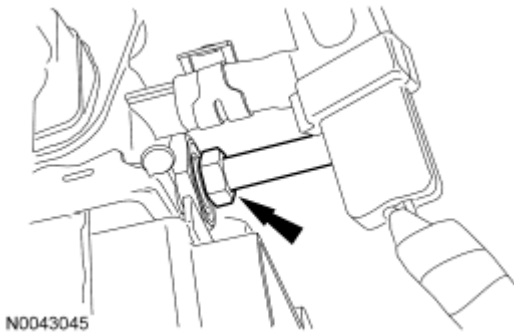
Locating Upper Transmission Fluid Cooler Tube
